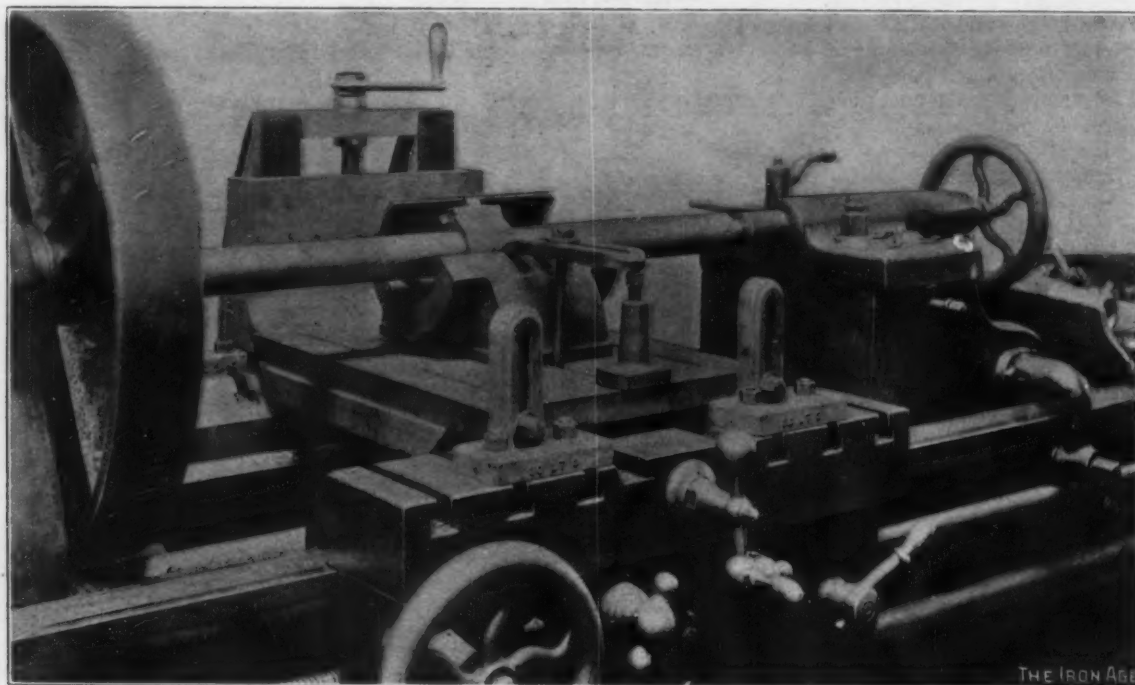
An Attachment for Converting a Lathe Into a Horizontal Boring Machine.—Made by H. B. Underwood & Co., Philadelphia.
